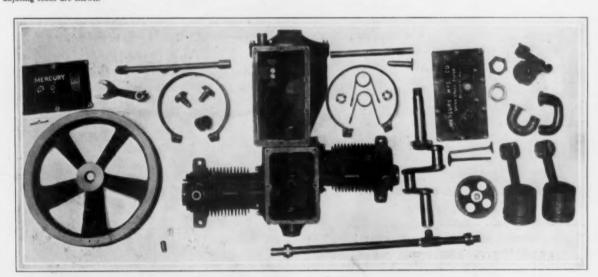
Disassembled View of the Mercury Air-Cooled Engine. All bearings are plain. The automatic intake valves are 1% in. diameter, mechanical exhaust 1% in. The push rods are % in. diameter. The pistons are fitted with ¼ in. rings pinned to place. The wrist pins are 1 x 2% in., held in the pistons. Crank pin bearing adjustment is through shims. The transmission bands are shown, also the fan-spoked flywheel, which is carried on the front end of the shaft. Lubrication mechanical, force feed and splash.
